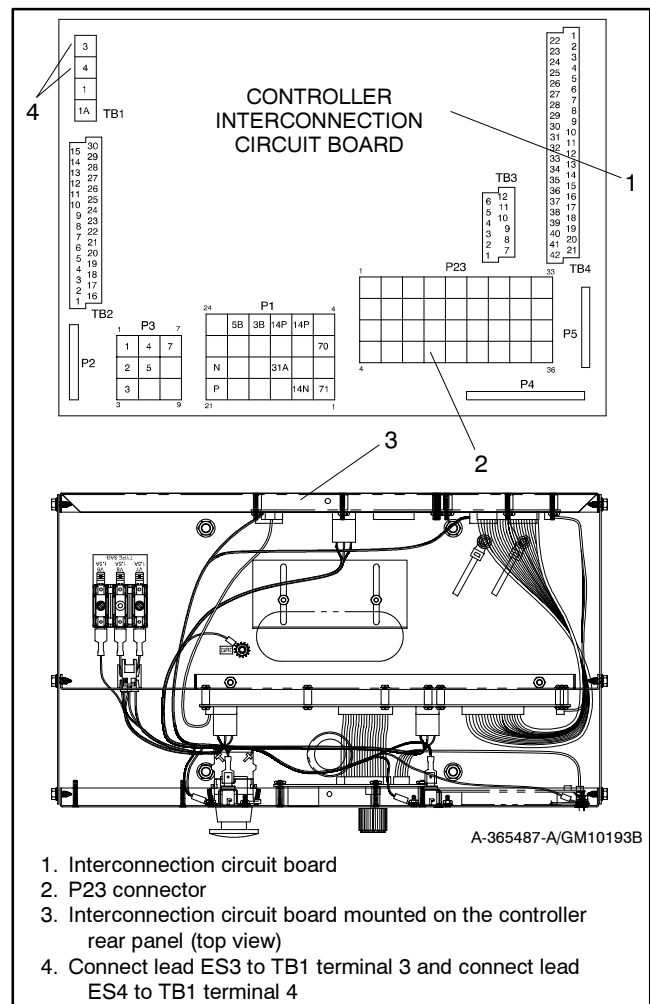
Attaching Wiring Connection Harness to the Interconnection Circuit Board
